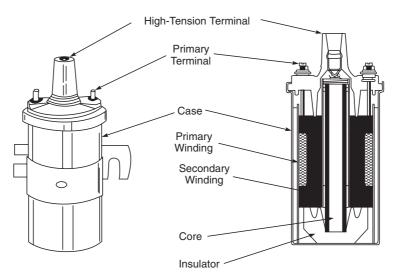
Assembled and Internal Mechanism of Ignition Coil (Courtesy: Maruti Udyog Ltd.)
